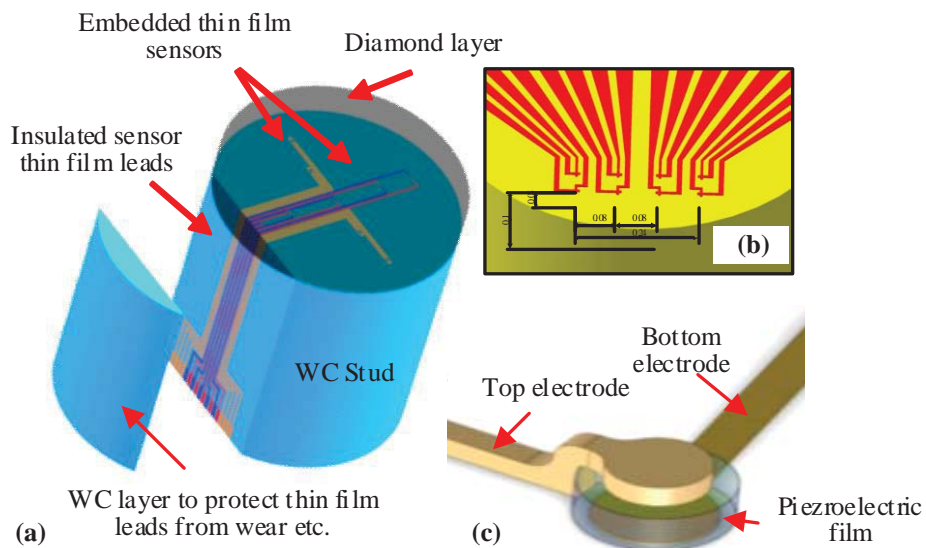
Plausible sensor layouts (not to scale): (a) PDC cutter with embedded sensors; (b) enlarged view of the μ -TFTC; (c) enlarged view of the μ -TFFS. (By courtesy of Dr. Xiaochun Li from UCLA)
